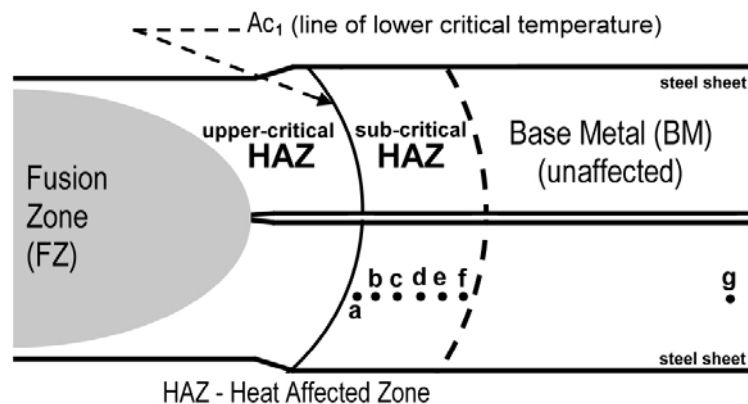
Schematic cross-section of a resistance spot weld showing the different regions formed during welding, for instance: fusion zone (FZ), heat affected zone (HAZ) and base metal (BM).
